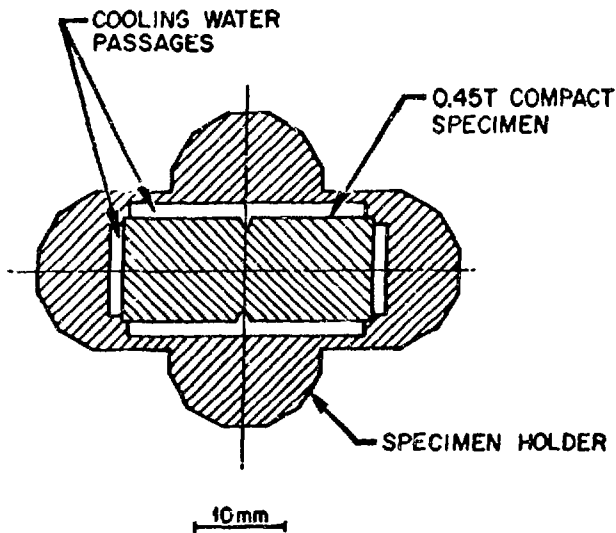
Cross section through the HANSAL-T1 capsule, showing the outer shroud holding the stack of specimens, the specimen cross section, and the channels for cooling water on all sides of the specimen stack.
